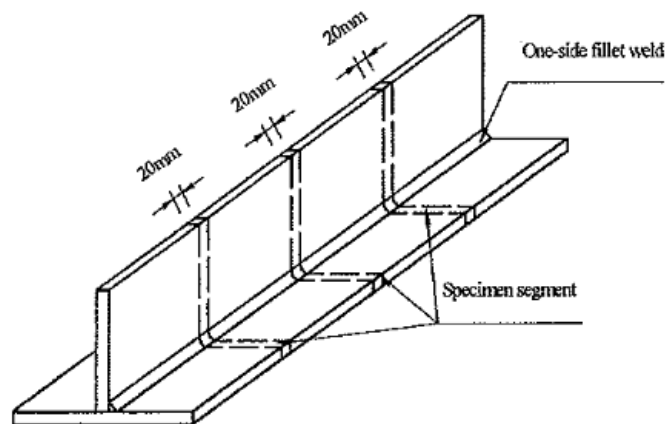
Experimental segment for single-sided fillet weld specimen (Chen et al. 2001)
